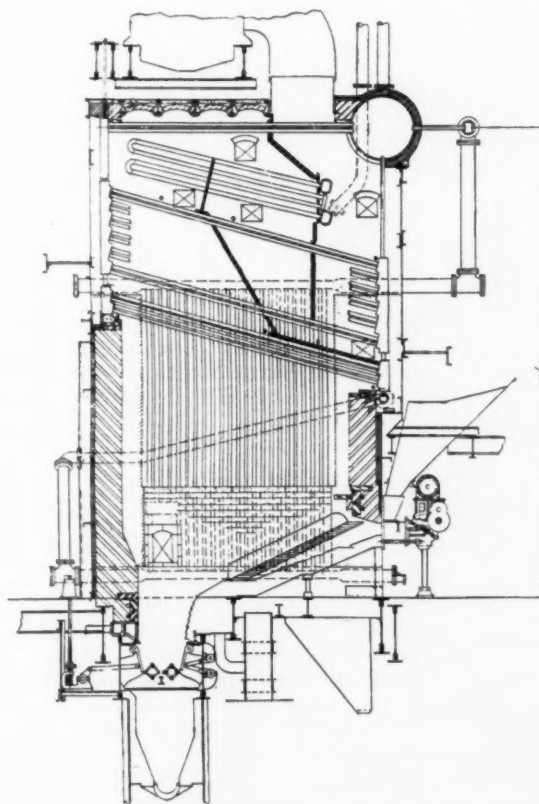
CROSS-SECTION OF FIN-WALL FURNACE AND BOILER AT HELL GATE
